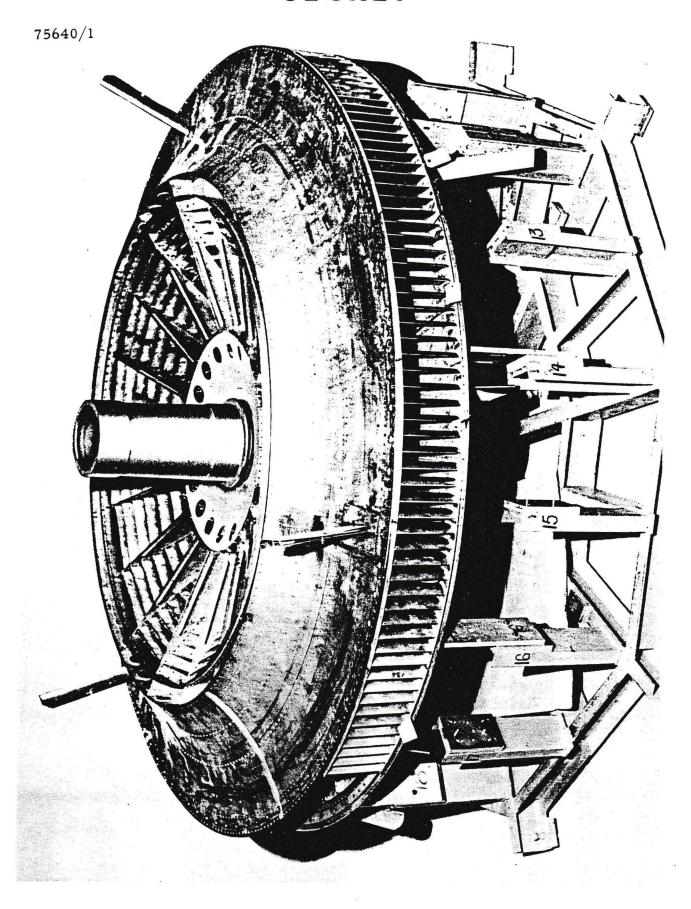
FIXED CENTRE STRUCTURE AND SHAFT ASSEMBLED
